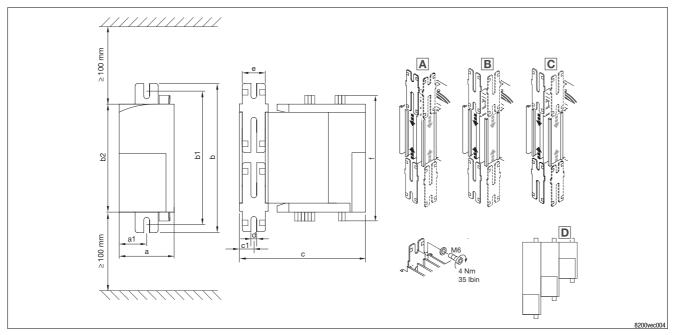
Standard mounting with fixing rails 0.25 ... 2.2 kW
